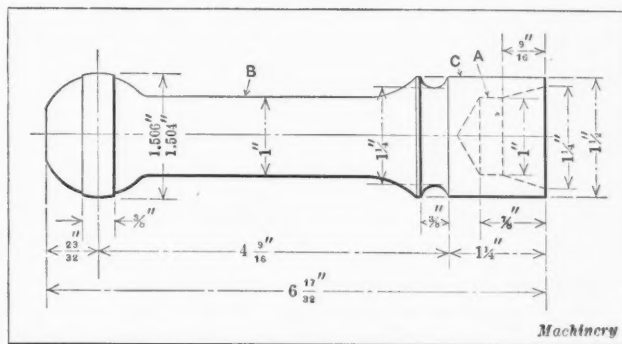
Bar Stock Part, with Contour formed by Special Tool
